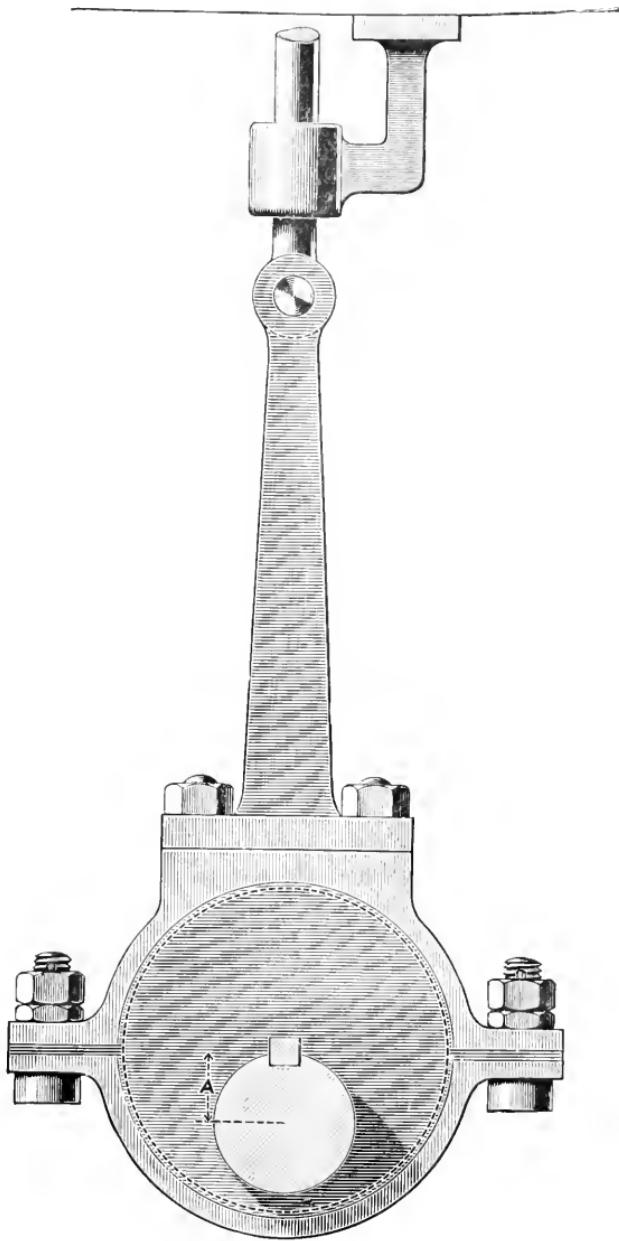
SKETCH ILLUSTRATING CONVERSION OF MOTION BY MEANS OF ECCENTRIC WITH STRAP AND ROD. (Page 74.)
